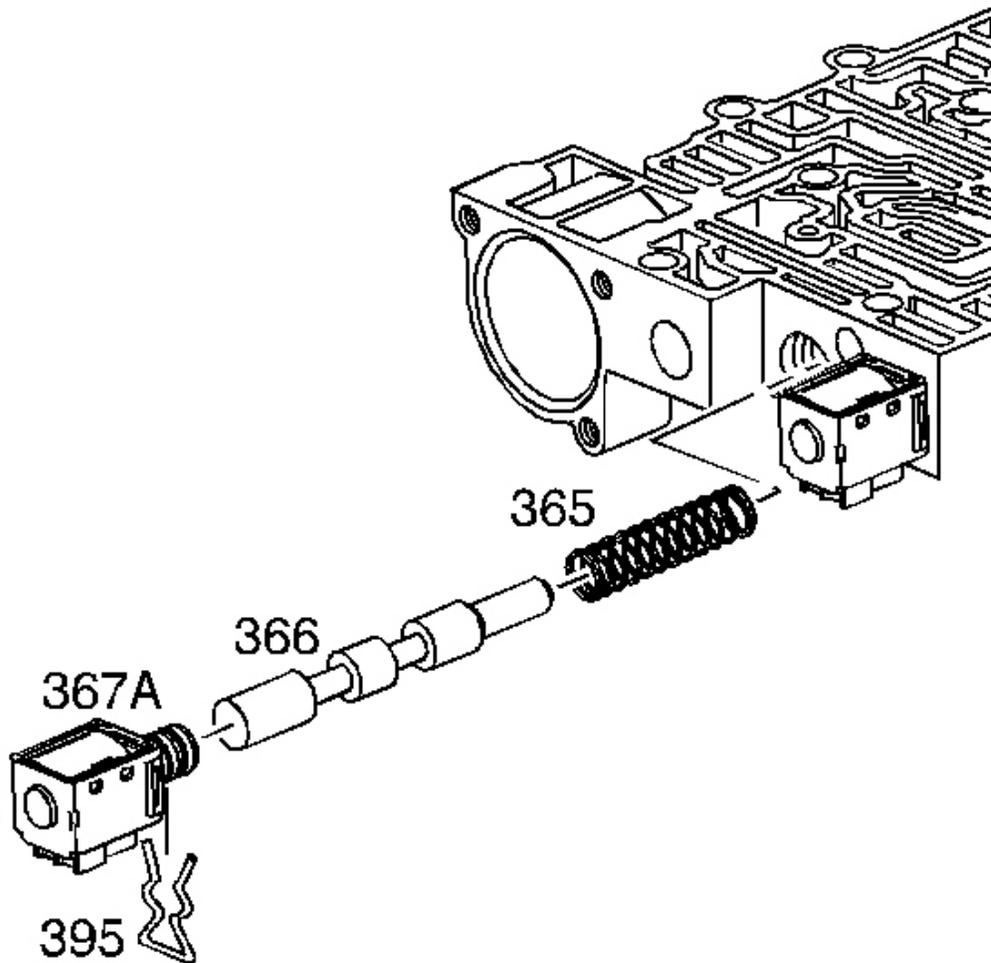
Solenoid Retainer, 1-2 Shift Solenoid, 1-2 Shift Valve, 1-2 Shift Valve Spring
